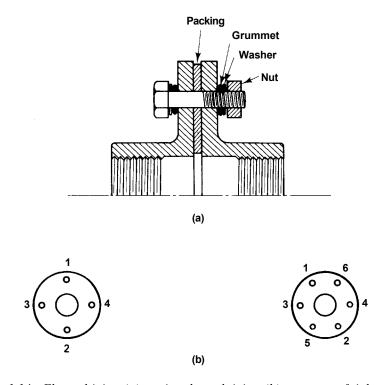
Flanged joint: (a) section through joint; (b) sequence of tightening bolts
